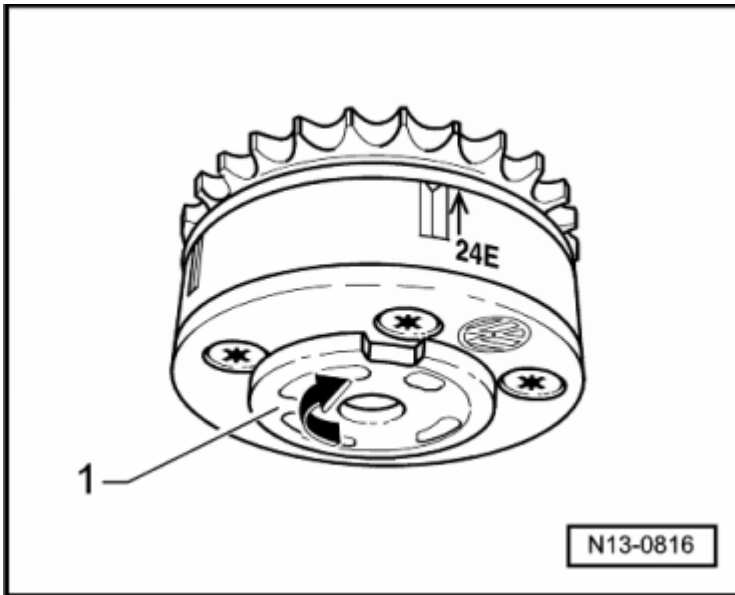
Identifying Sensor Wheel Turned To The Right At Intake Camshaft Adjuster
